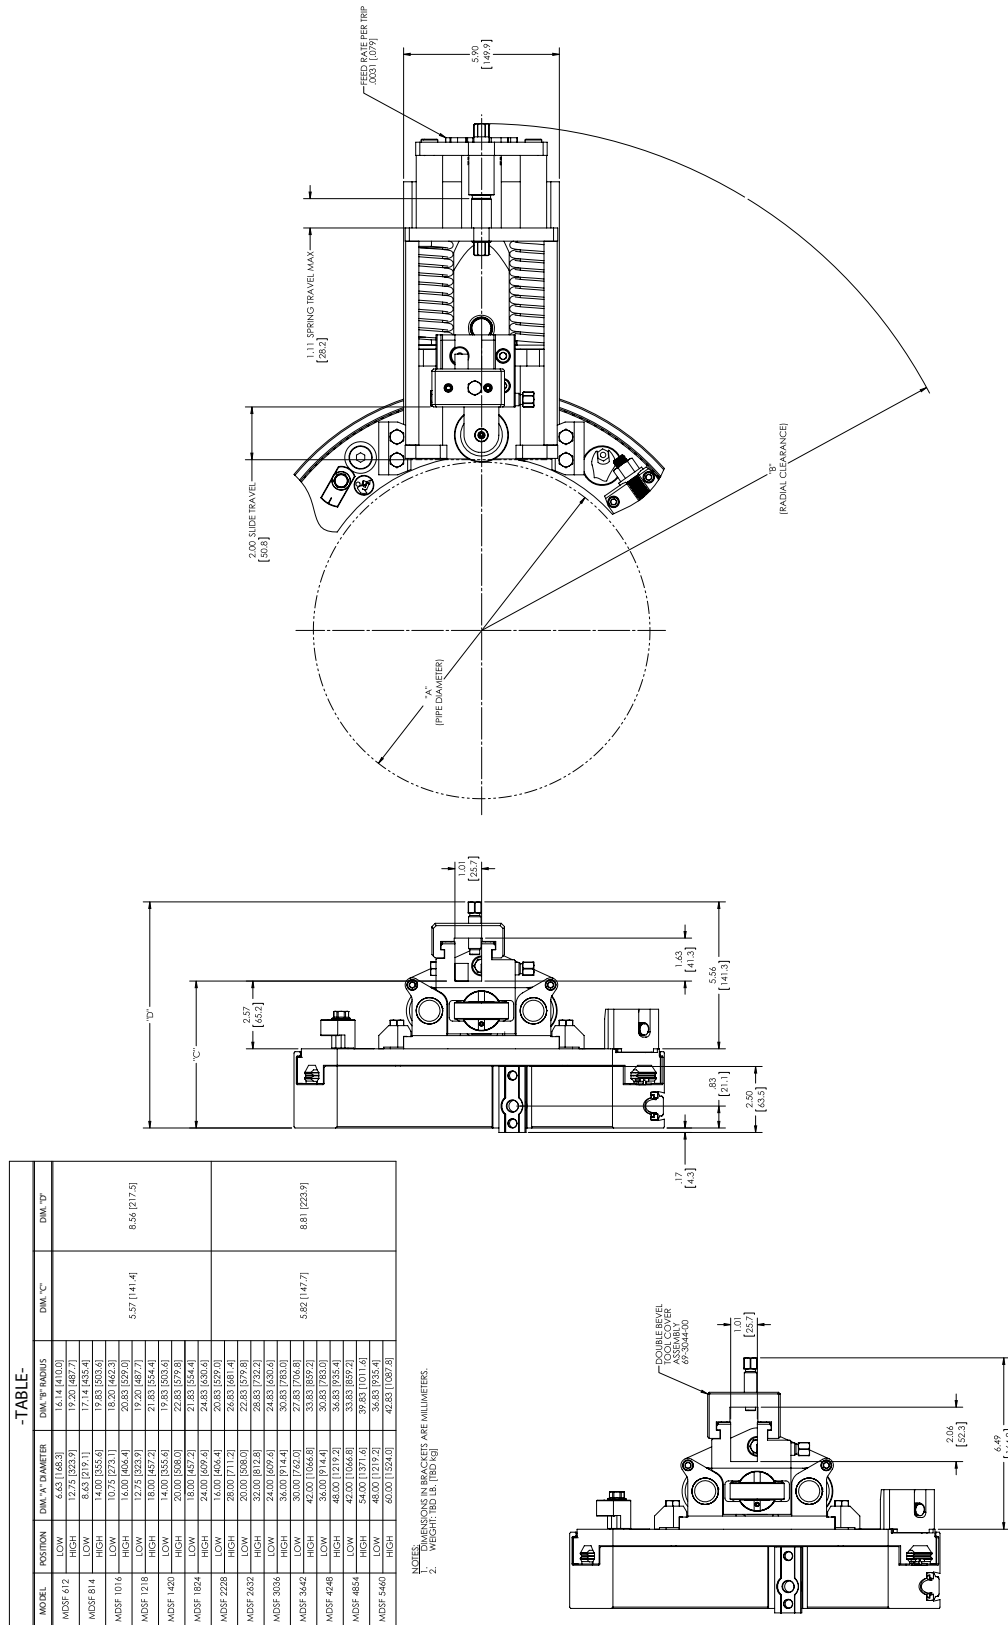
This drawing shows the operating dimensions of the slides for all machine sizes.
